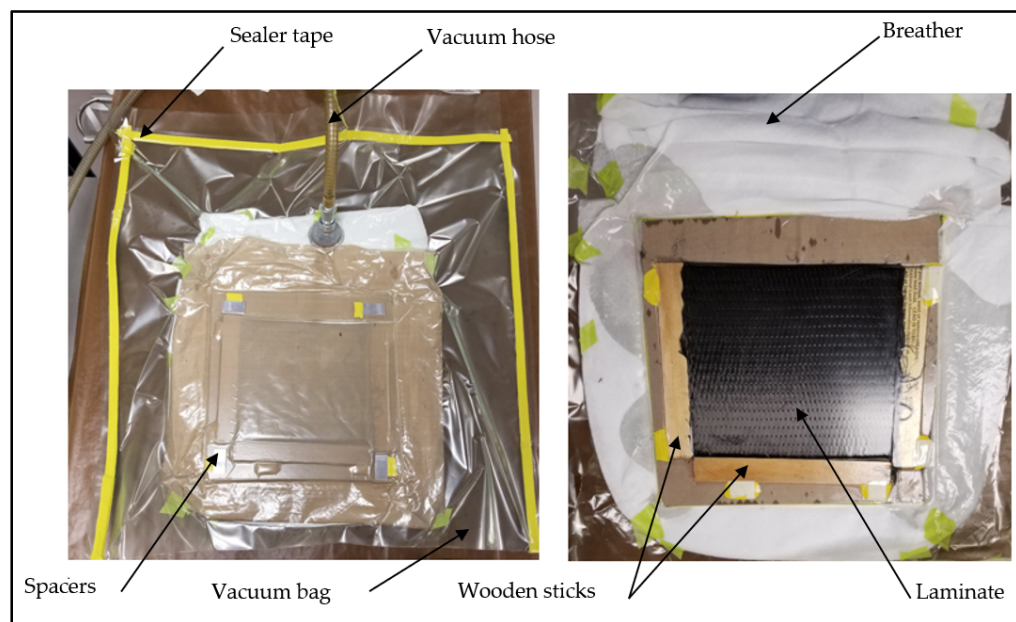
Contact molding assisted with vacuum bag and hot press
